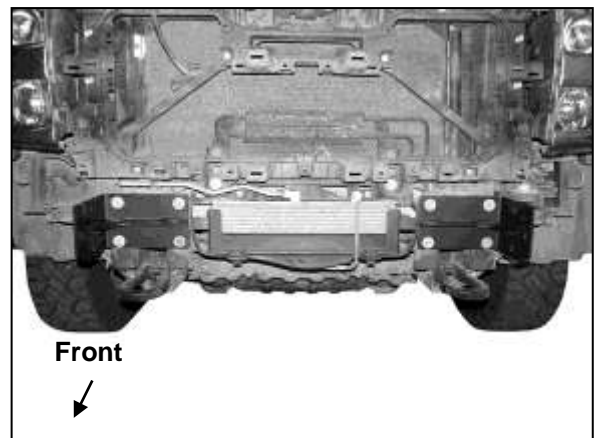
Unfold outer Wings from center Bumper. Passenger/right side illustrated from below
